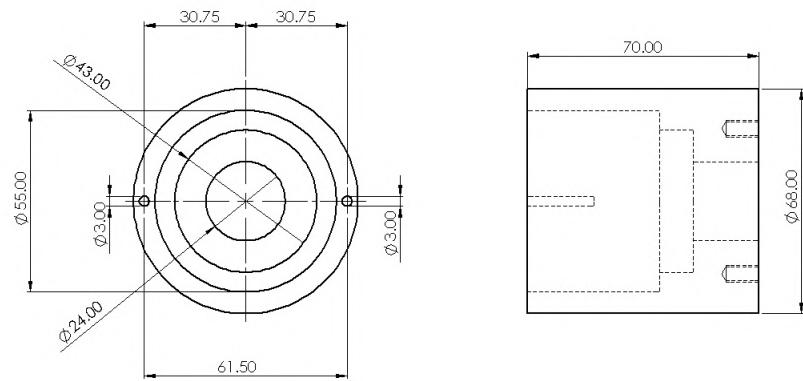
2D Drawing of the Ball Nut housing (All dimensions are in mm)
